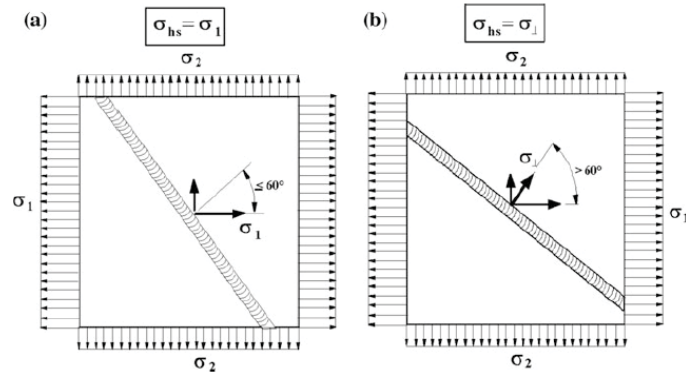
Biaxial stresses at weld toe, principle stress within a) and without b) an angle of 60° perpendicular to the weld.
